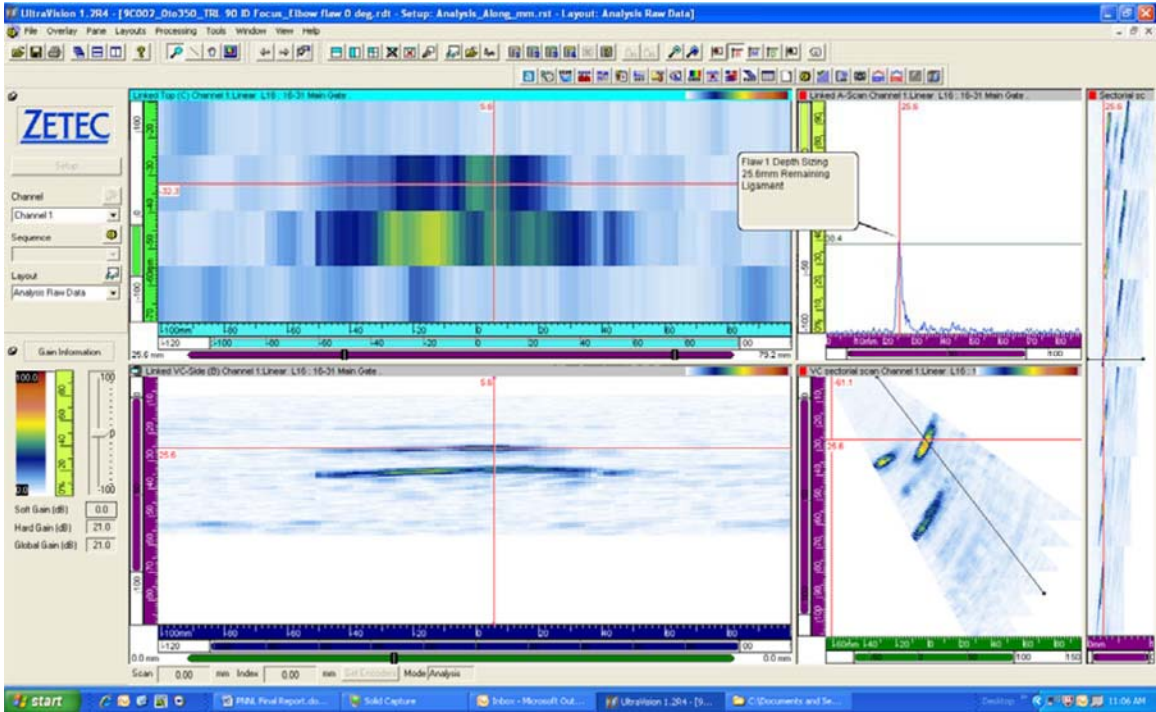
9C-002 Implanted Flaw 1 from the SCSS Elbow Side for Depth Sizing
